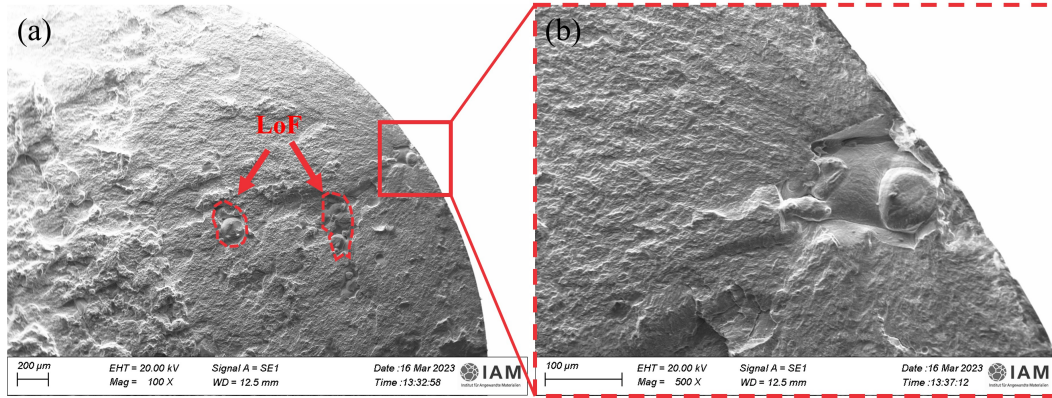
The fatigue fractography of AB+QT 450 °C specimen.
